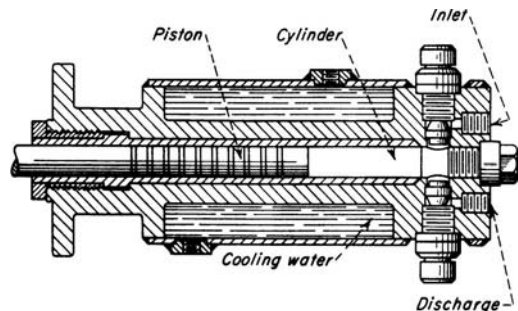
Forged-steel single-acting high-pressure cylinder.
